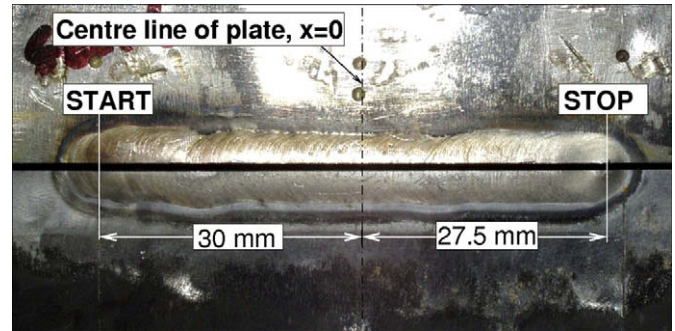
Detail of the single weld bead, showing the weld start and stop positions with respect to the centre of the plate. Note this image was taken after the plate was sectioned for the contour measurement.
